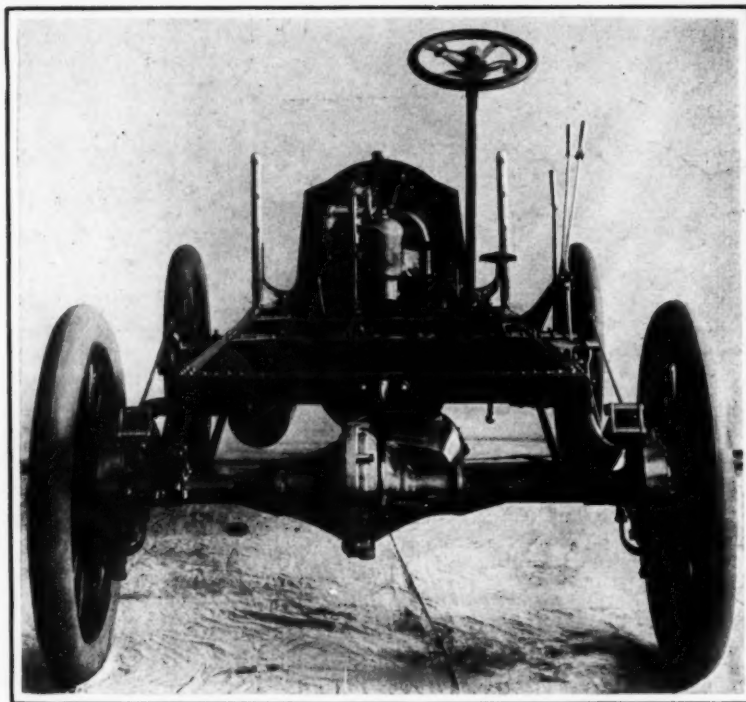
REAR VIEW OF PACKARD CHASSIS WITH SHAFT DRIVE.
